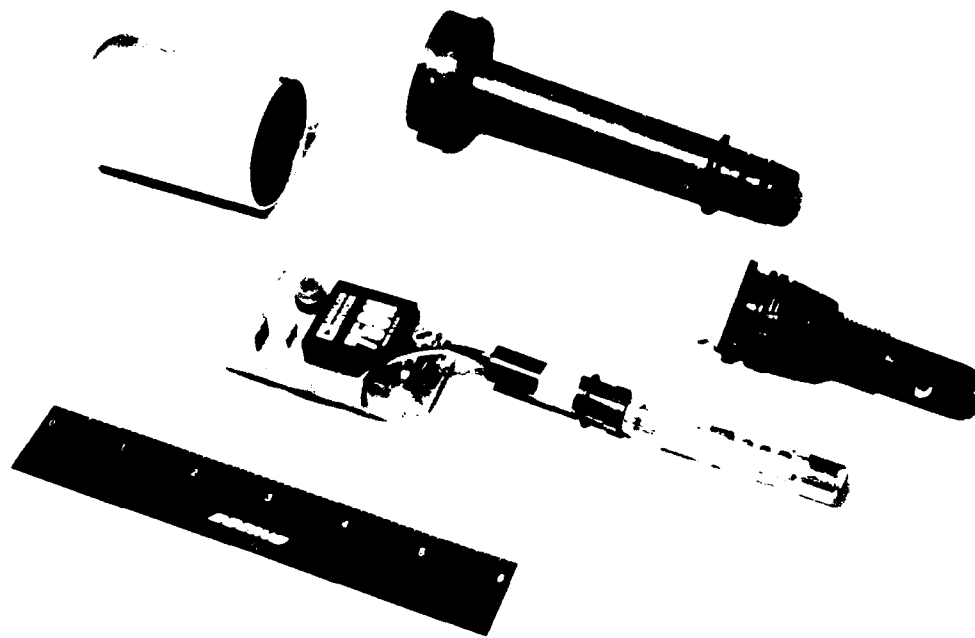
INDIVIDUAL DETECTOR ASSEMBLY BREAK-DOWN. PMT and printed circuit board in center are loaded into plastic molded unit at top of photo. Input-output cables (not shown) feed through the metal cannister (upper left) which then fits around the installed PC board/holder assembly. This final unit then plugs into the molded optics unit (far right) which itself is threaded into the scattering chamber.
